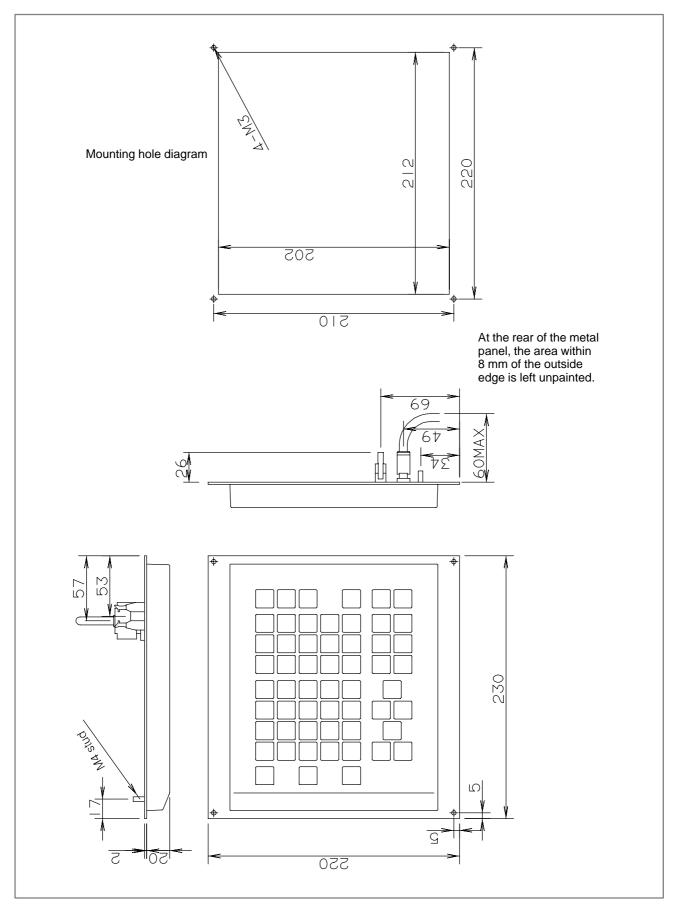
External dimensions of stand-alone type standard MDI unit (horizontal type)
